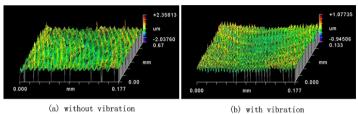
Images of the machined surface taken at a Zygo 3D surface profiler
